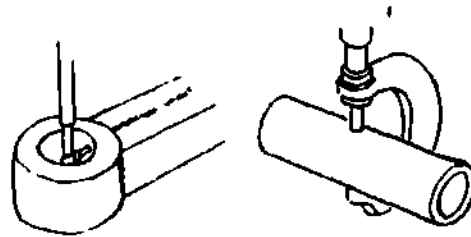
Measuring piston pin clearance with telescopic gage and micrometer.
